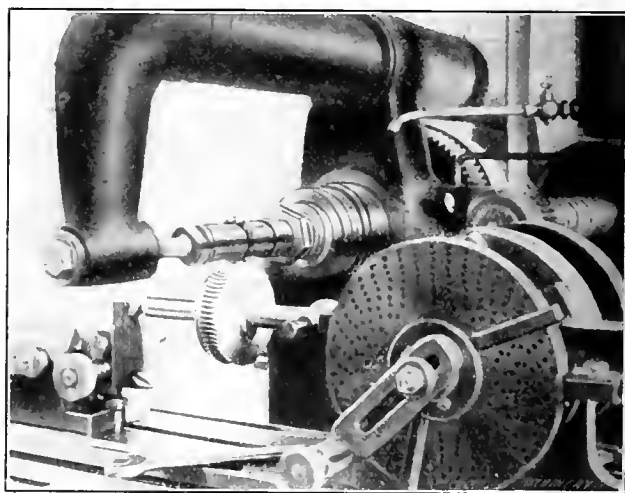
Gashing a Worm-wheel in the Milling Machine.
